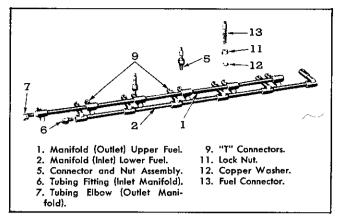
Fuel Oil Manifold and Connected Part Details and Relative Location of the Various Parts.
